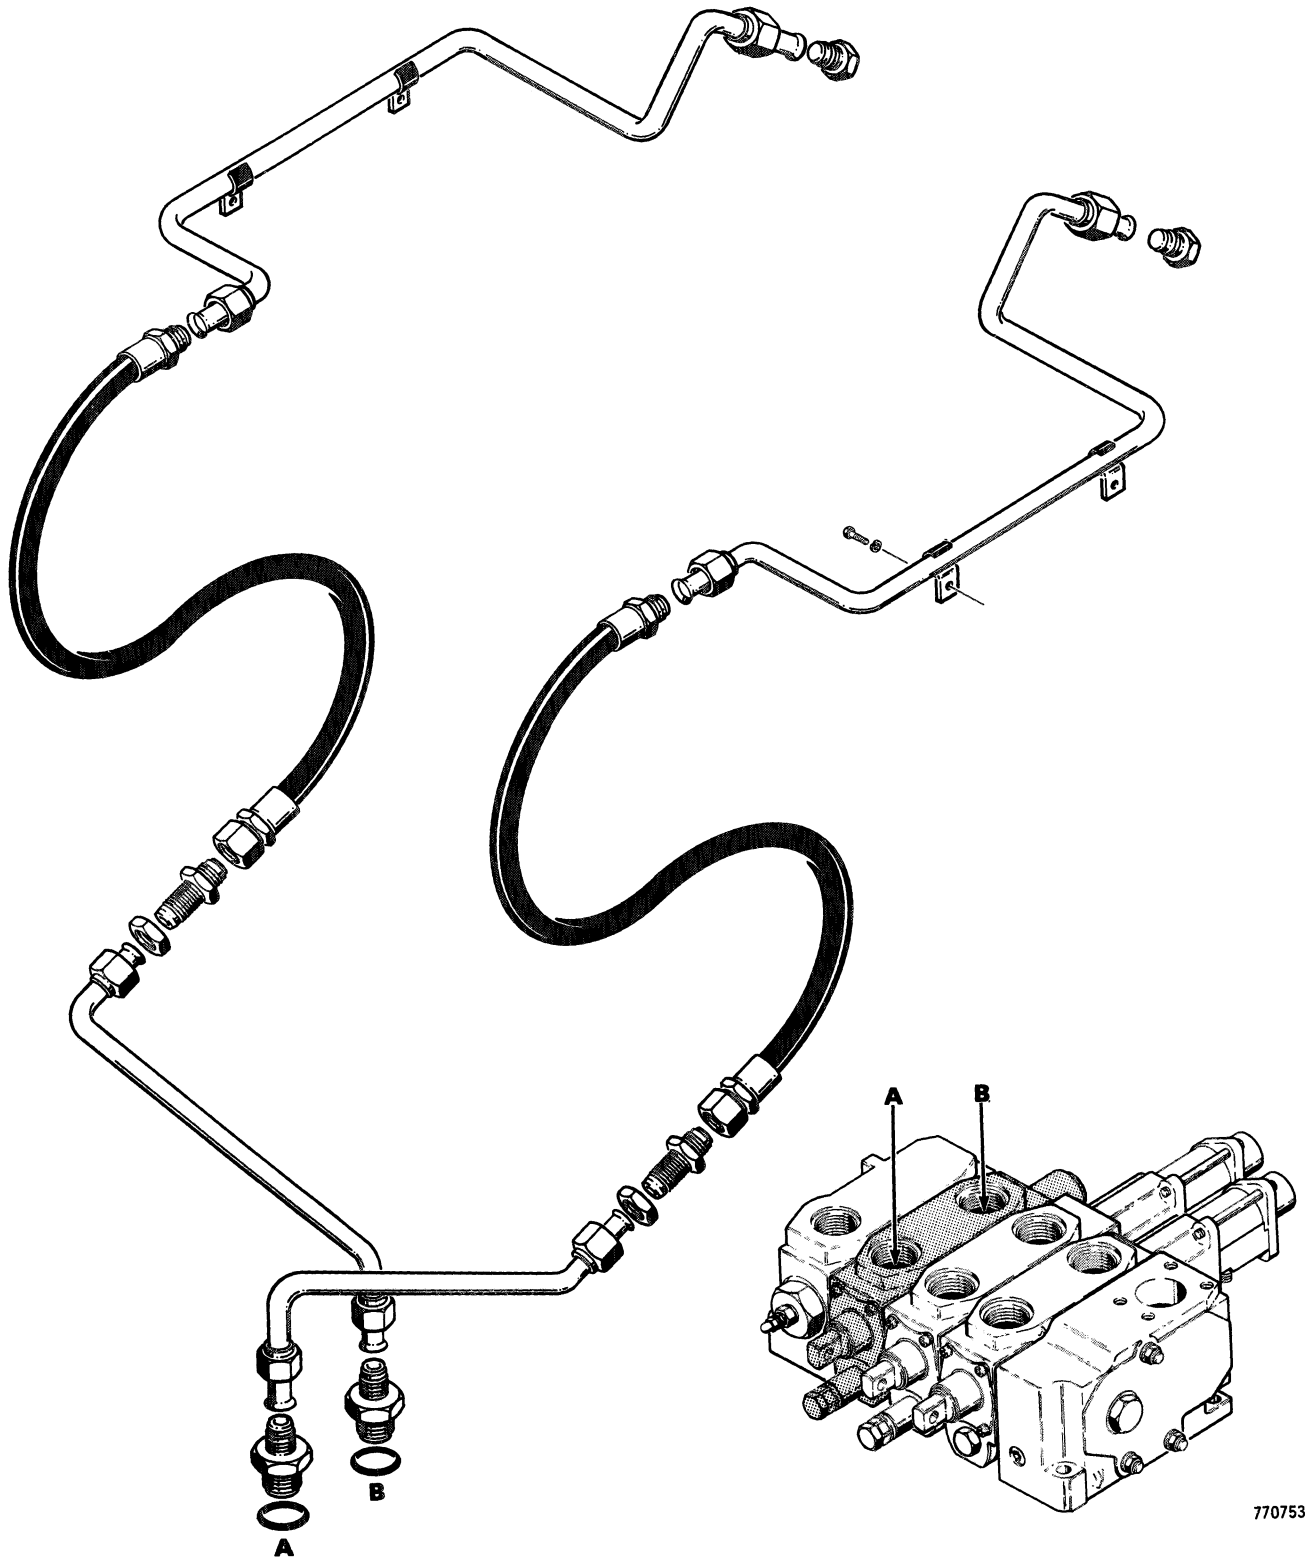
Clam Cylinder Loader Arm Hydraulic Installation
